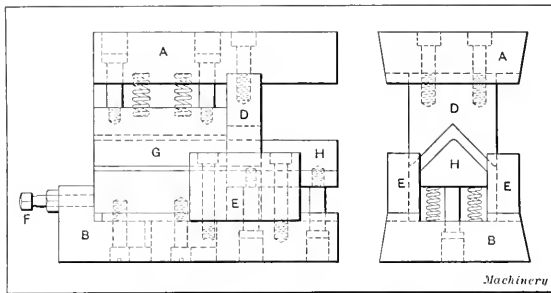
Side and End Views of Shear for cutting Angle Irons
